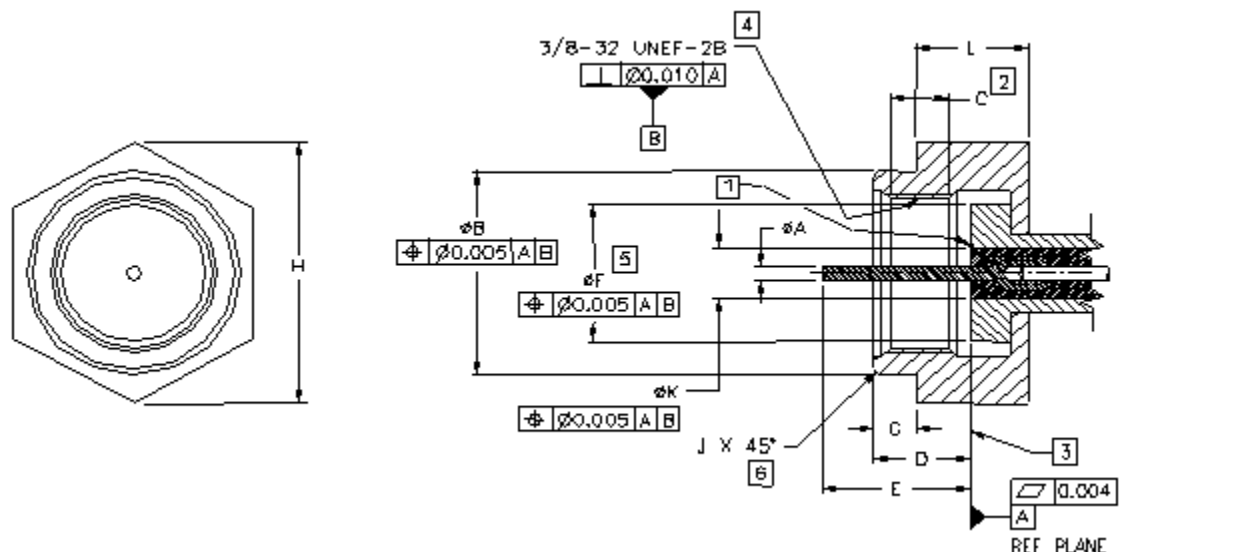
Recommended Male "F" Pin Type Connector Drawing
